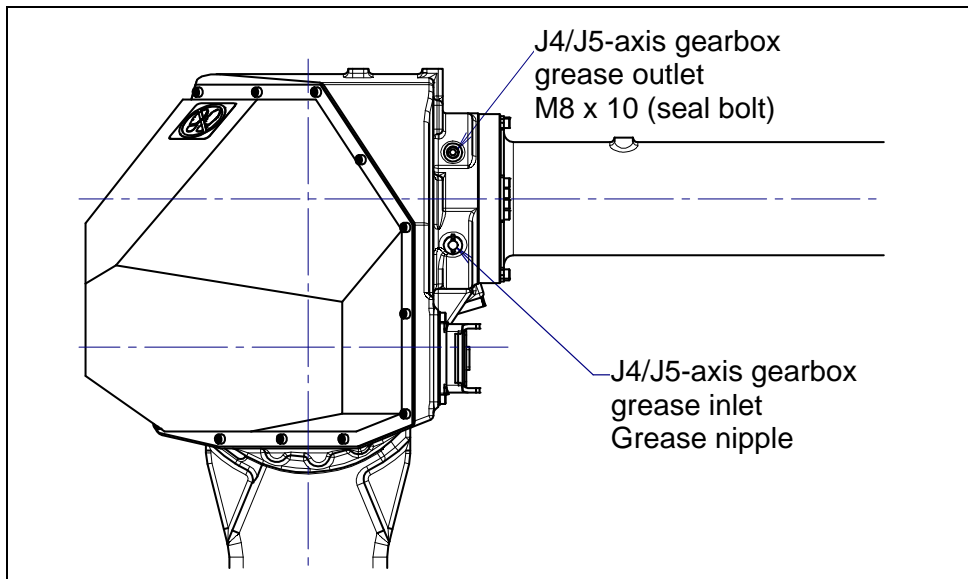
(b) Replacing grease of the J4/J5-axis gearbox (M-710iC/50H)
